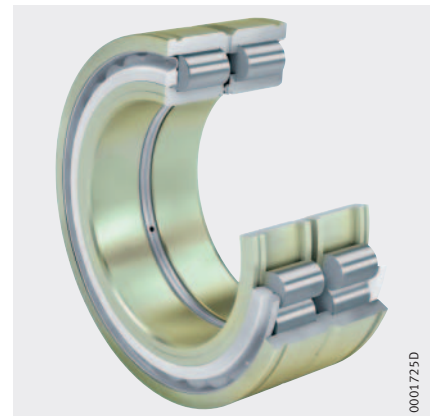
· Cylindrical roller bearing with anti-corrosion protection and seals
